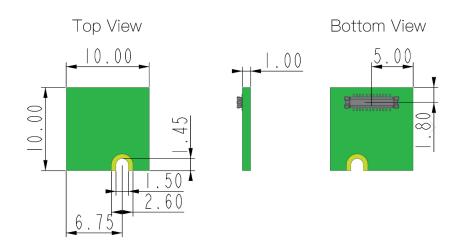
RAK1904 WisBlock Sensor Mechanic Drawing
